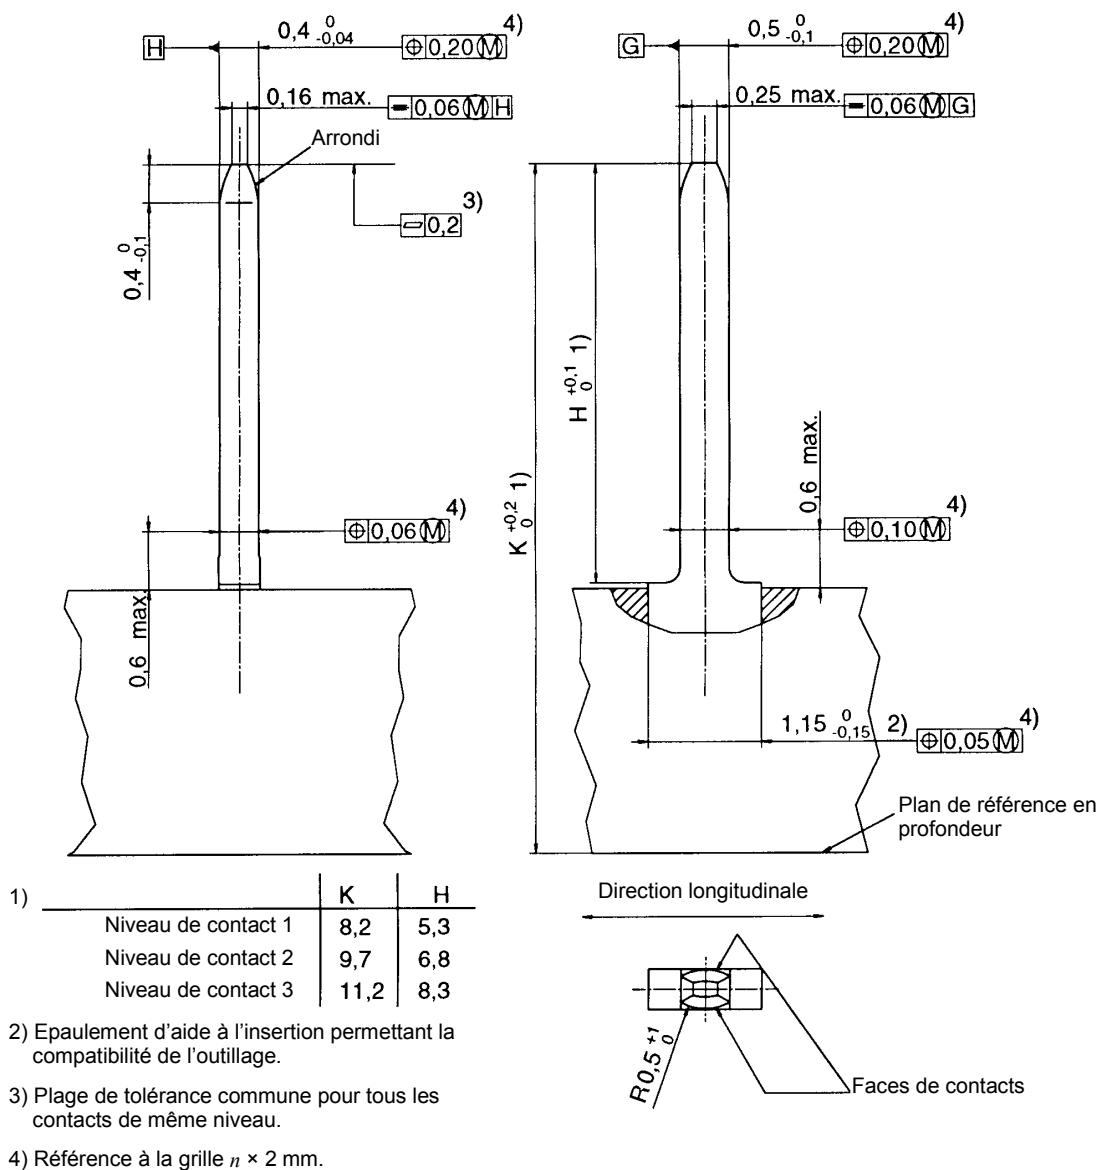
Dimensions of style N, fixed 25 mm extension module with three special contacts
